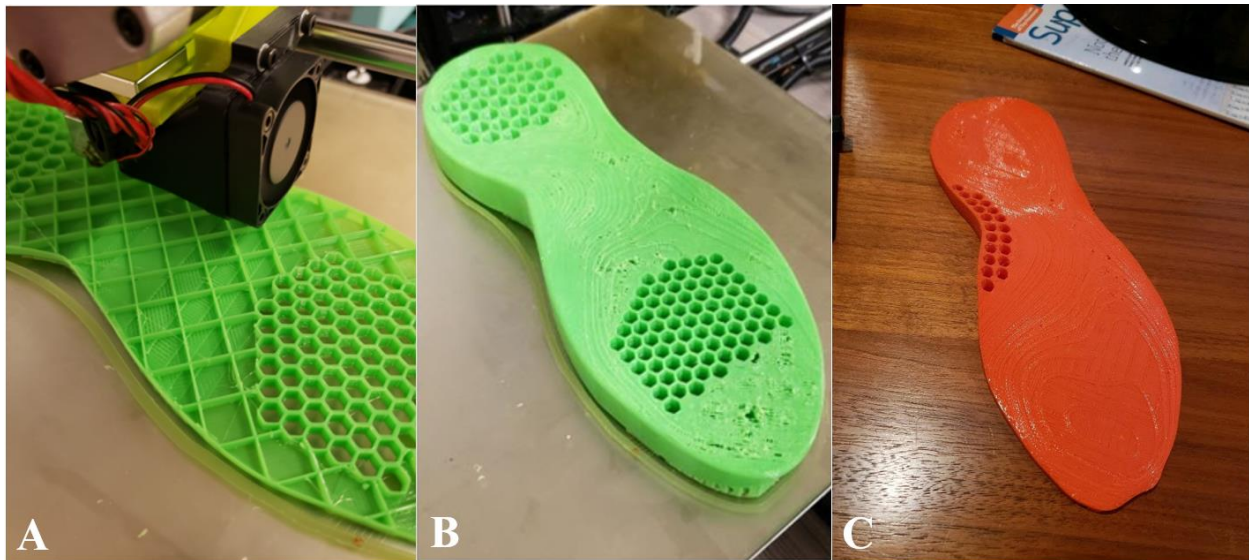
Prototype Fabrication. A) Grid infill design during the 3D printing process for Prototype 1 fabrication. Infill percentage was set to 10% for this print and the design included smaller, more densely packed vertical, full-depth hexagon extrusions in the forefoot and larger, less densely packed vertical, full-depth hexagon extrusions in the heel region. B) Completed 3D print of Prototype 1. C) Completed 3D print of Prototype 3.
